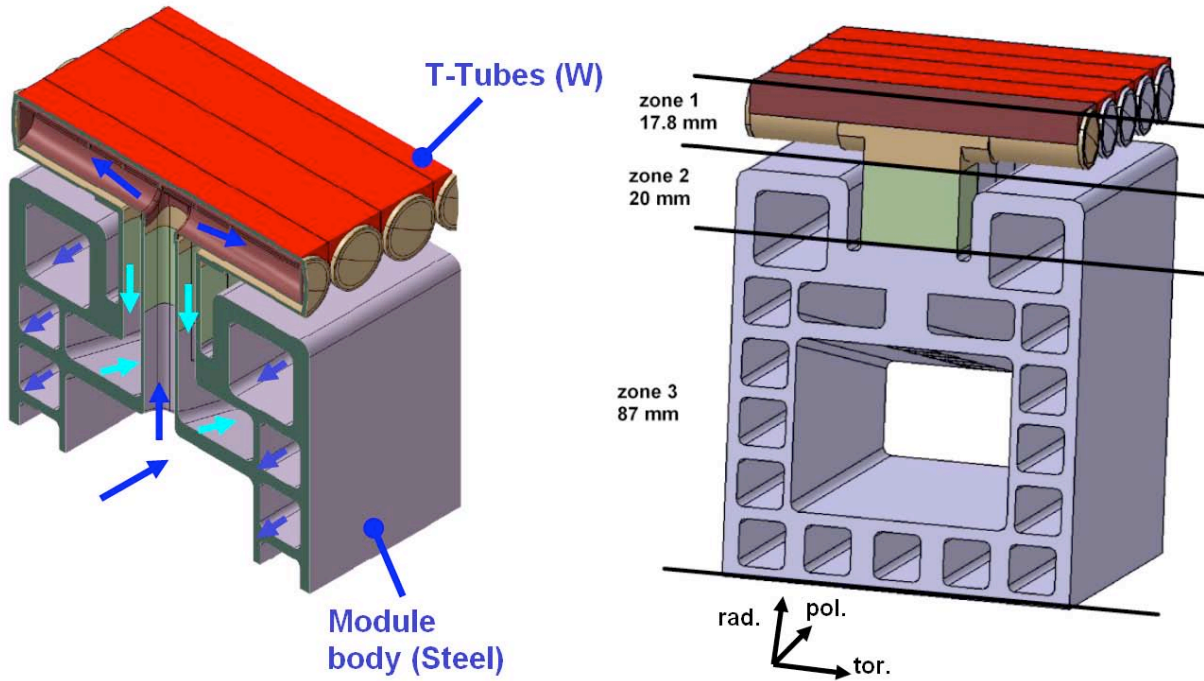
Target and manifold design concept (detailed CAD model)
